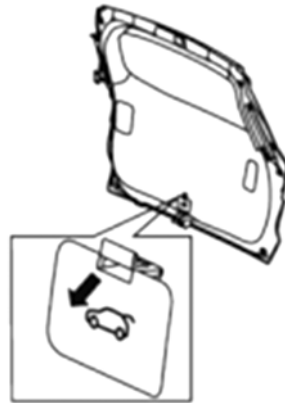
Position of CX70 Back Door Emergency Unlock Cover Plate
